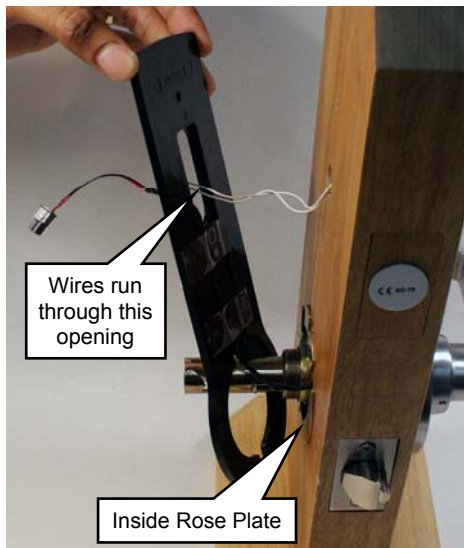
D: ROUTE THE MOTOR WIRE WITHIN THE GROOVE CLOSEST TO THE MOTOR WIRE. TAPE WIRE IN PLACE
